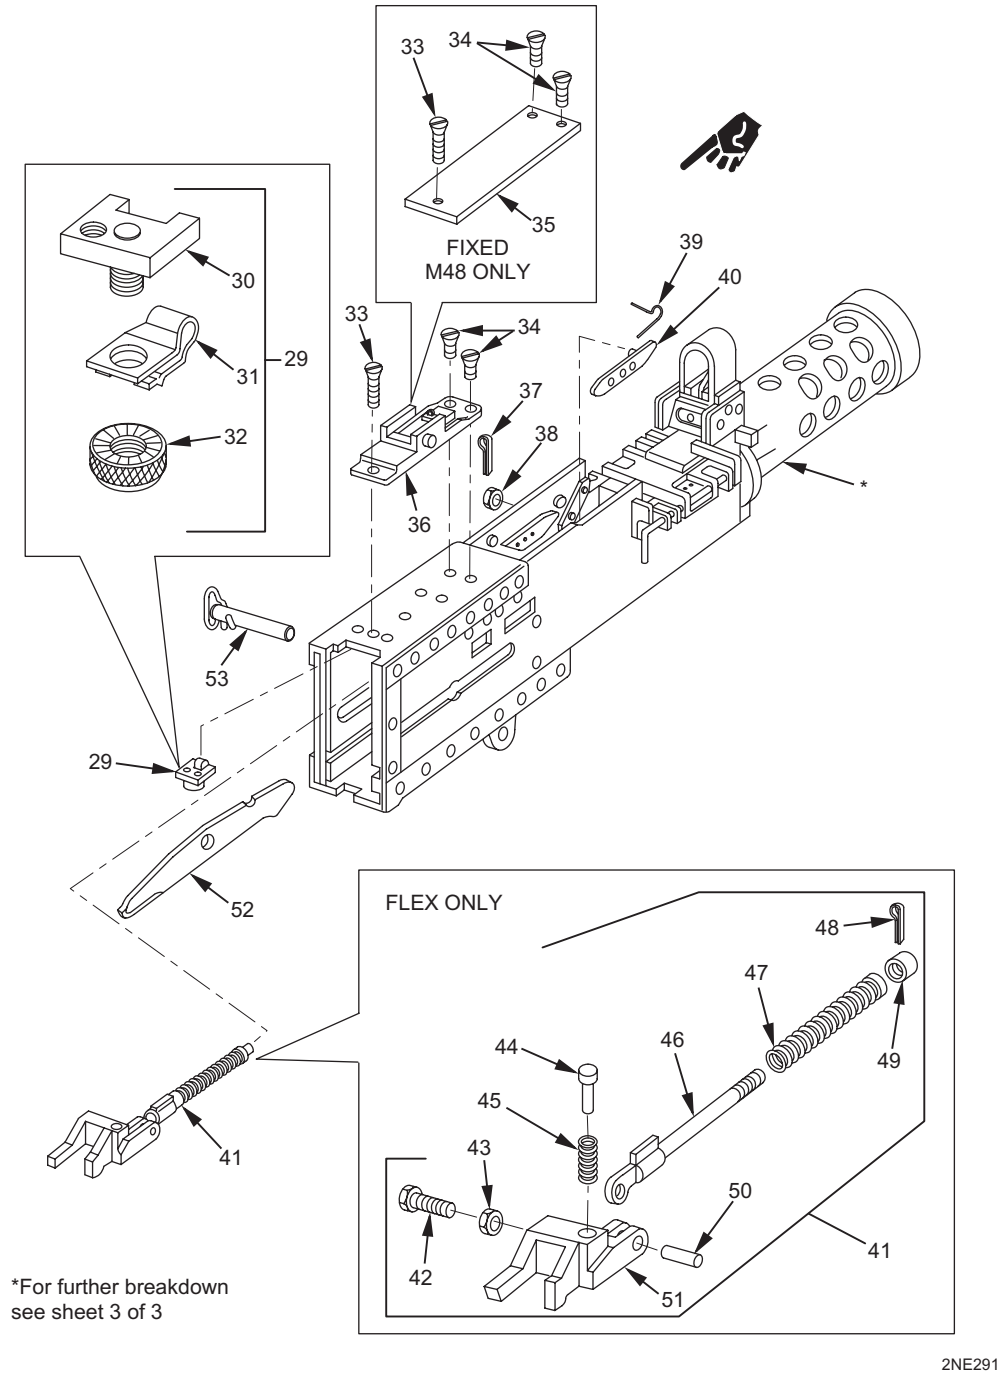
Flex and Fixed M48 Turret Type Caliber .50 M2 Machine Gun 7265636 and 12002953; Flash Suppressor 7162072; Adjustable Trigger Lever Stop Assembly 7265212; Bolt Latch Assembly 8448125; and Rear Right Hand Cartridge Stop Assembly 5577409 (Sheet 2 of 3).
